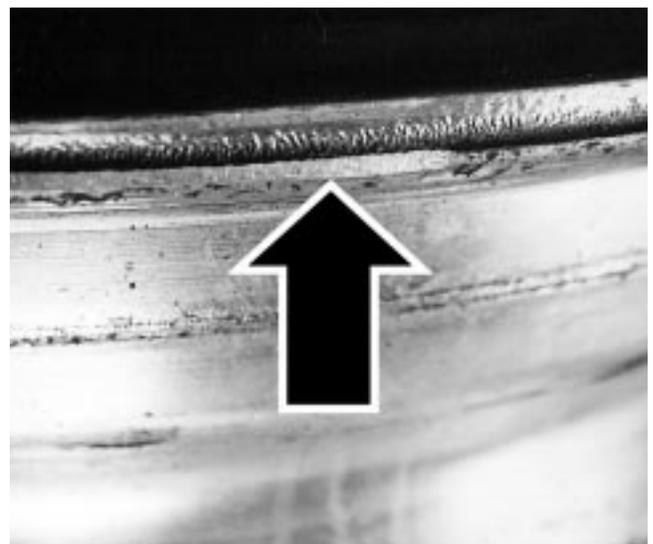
Adequate repair for sharp edge resulting from rim flange wear removes just enough metal to smooth the edge.
